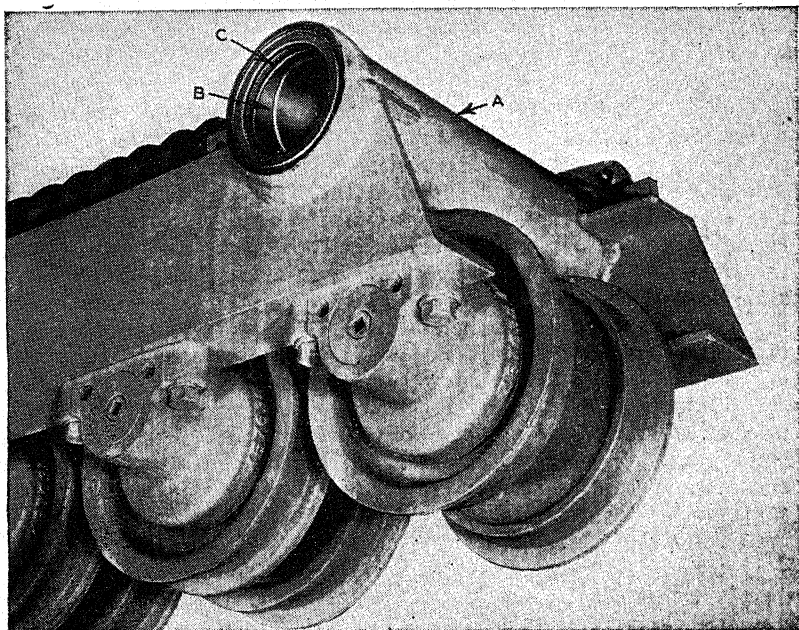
Section of track roller frame showing bearing made from standard tubing upset.
